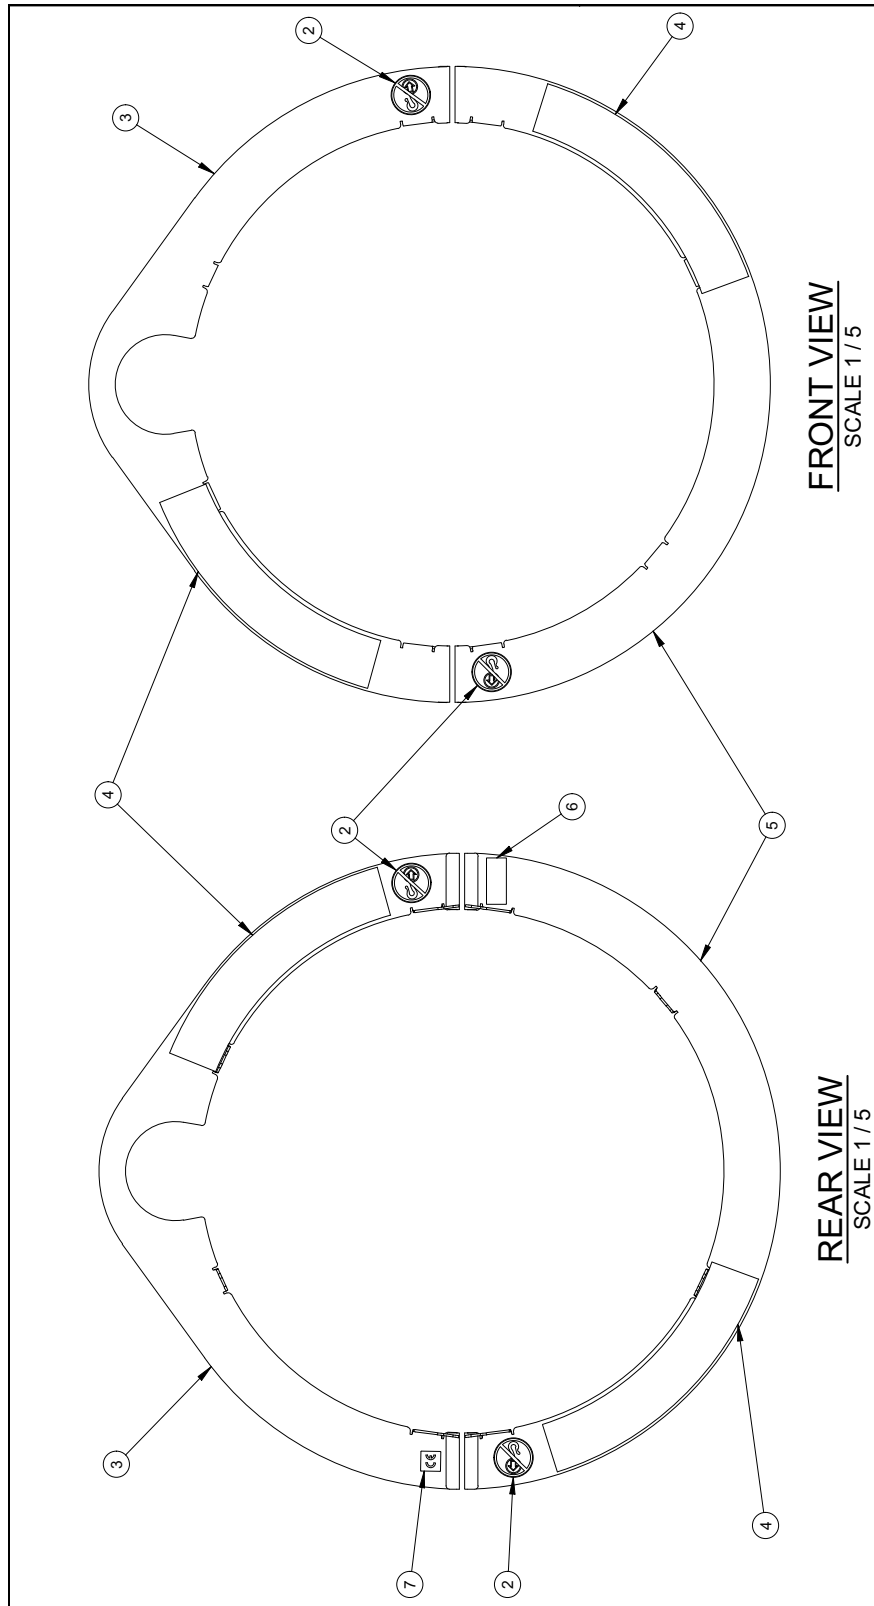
AFC-14 DEFENDER™ GUARD KIT EXPLODED VIEW (P/N 97209)
